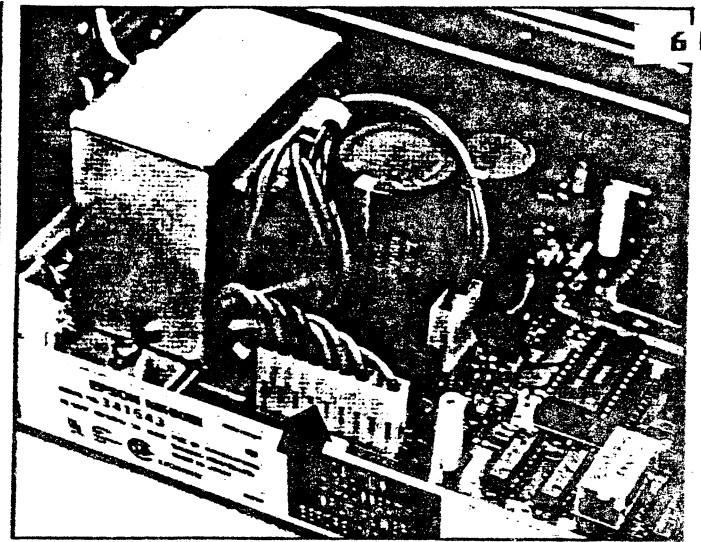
Remove CN2 and CN6 from the left rear corner of the control board.
